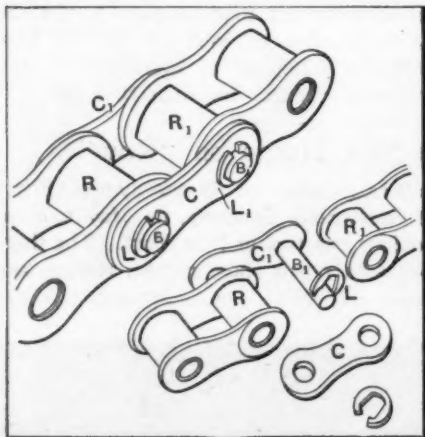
Baldwin roller chains, showing the method of attaching the links
